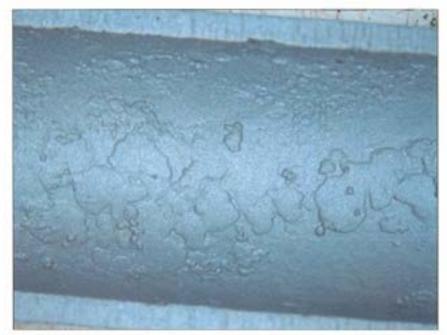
Corrosion damage on row 11 - tube 1 (bottom) after aluminum oxide blasting.
